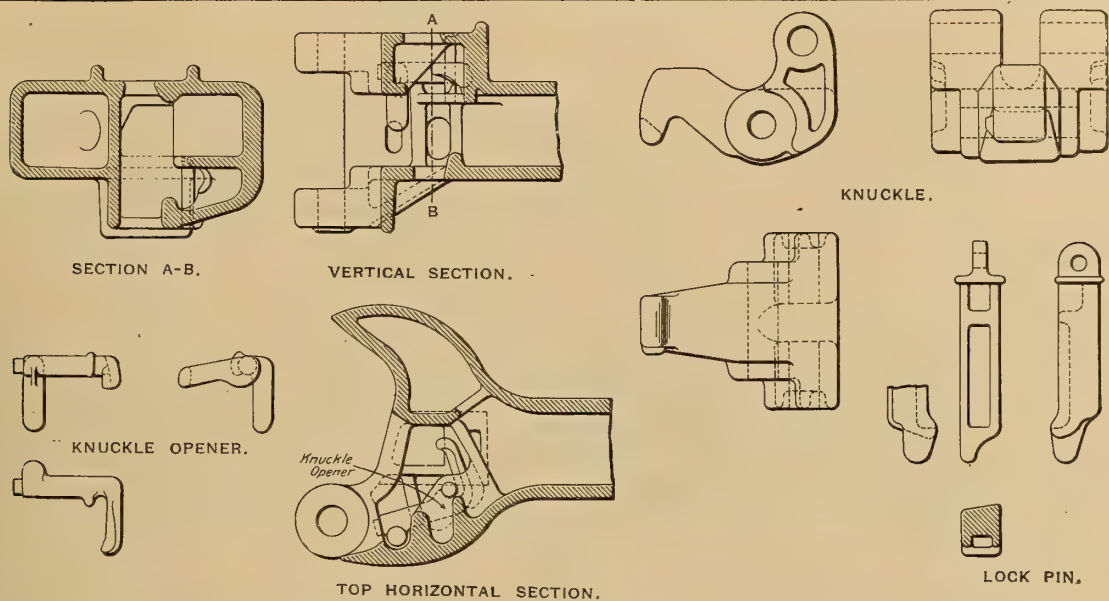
MAJOR COUPLER AND PARTS. 5 IN. x 7 IN. SHANK. BUCKEYE MALLEABLE IRON & COUPLER CO.
